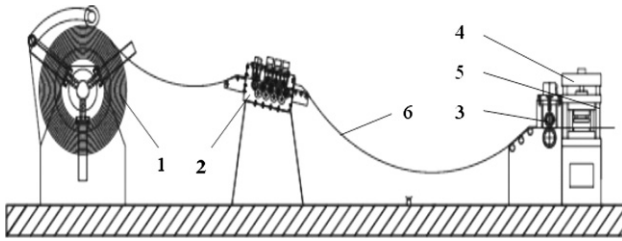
A typical automatic line elements for sheet metal forming (EAE machinery) 1 – decoiler, 2 – straightener, 3 – feeder, 4 – press, 5 – die, 6 – sheet metal strip.
